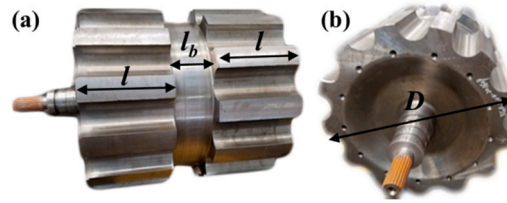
Pictures of HIA rotor. (a) side view, (b) front view.
